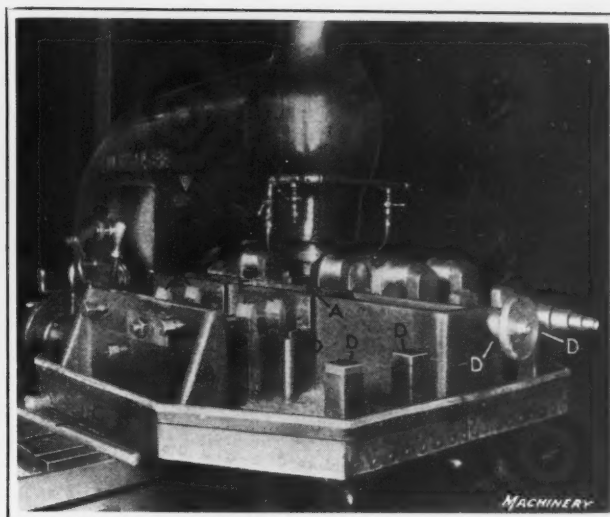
Vertical Miller equipped with Multiple Fixture for milling Counterweight Seats on Essex Crankshafts
